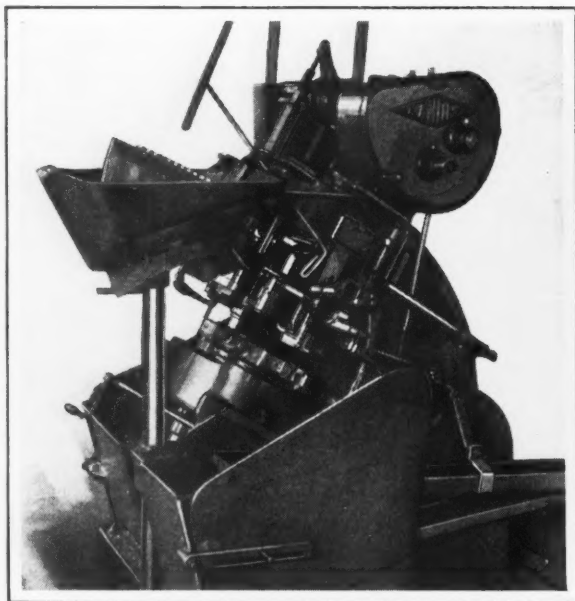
Landis Forming and Threading Machine with Work Delivery Conveyor
